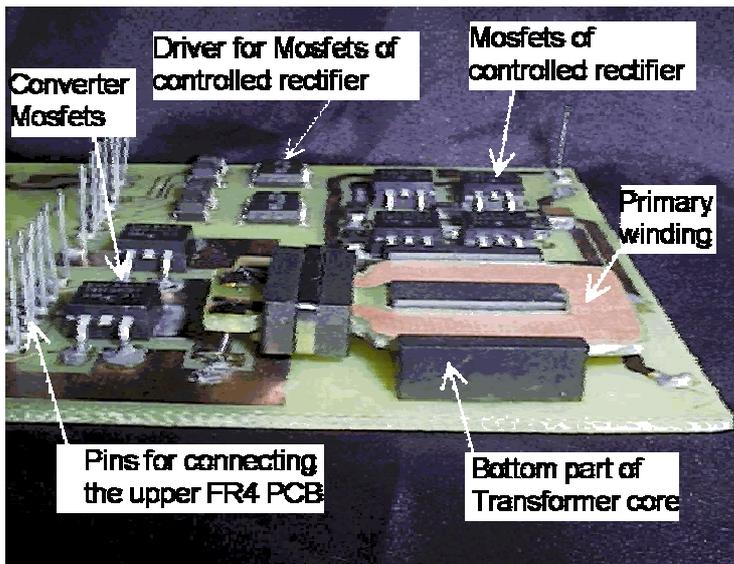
Top-view of IMS base plate of the 1<sup>st</sup> generation prototype of the MIC (upper FR4-PCB removed).
